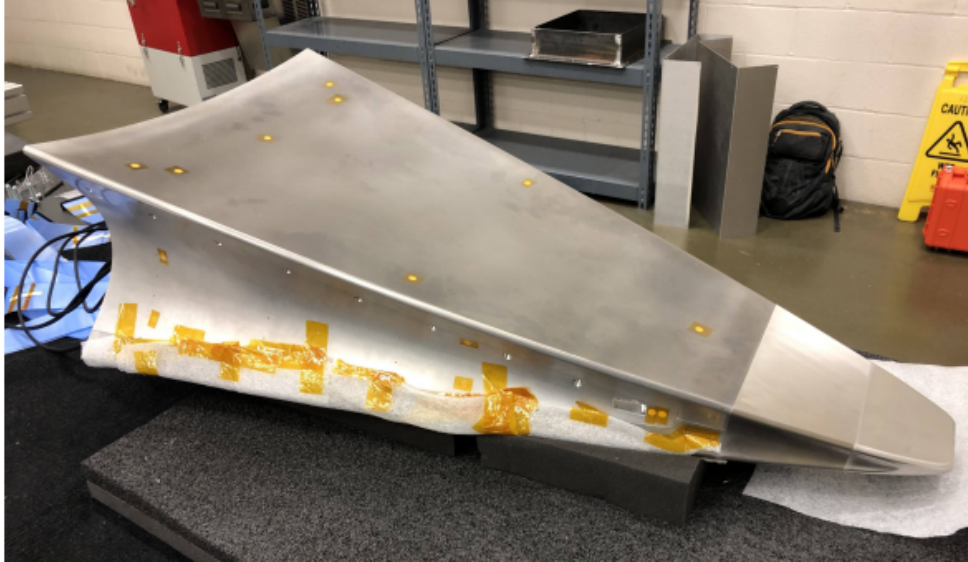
Final assembly of the BOLT Flight Geometry. Taken from Figure 13b of [10].
